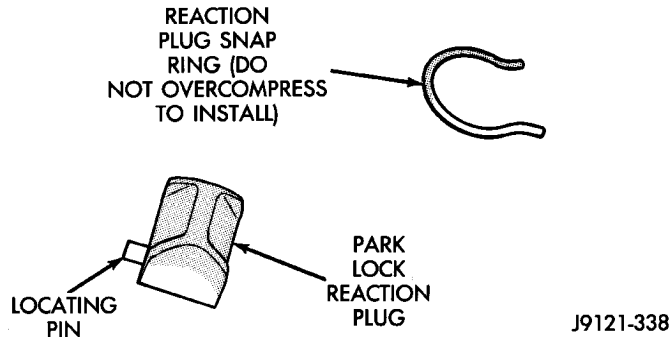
Reaction Plug Locating Pin And Snap-Ring
